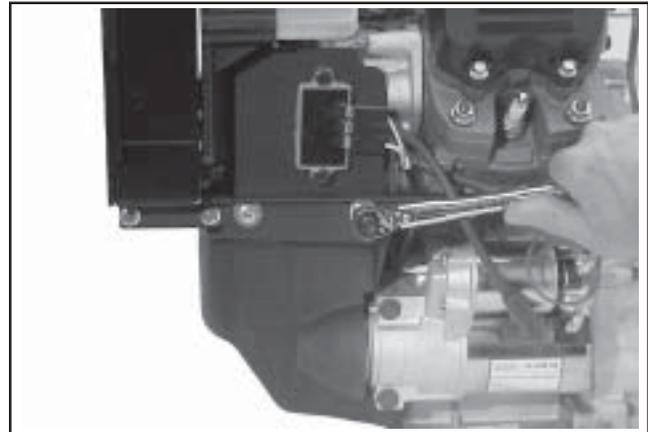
Torquing Lower Screws and Rectifier-Regulator Mounting.
